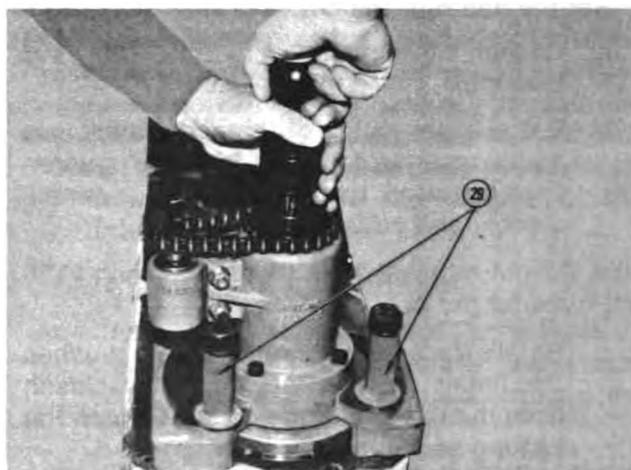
(N101104). Align The Tool In The Counterbore.
